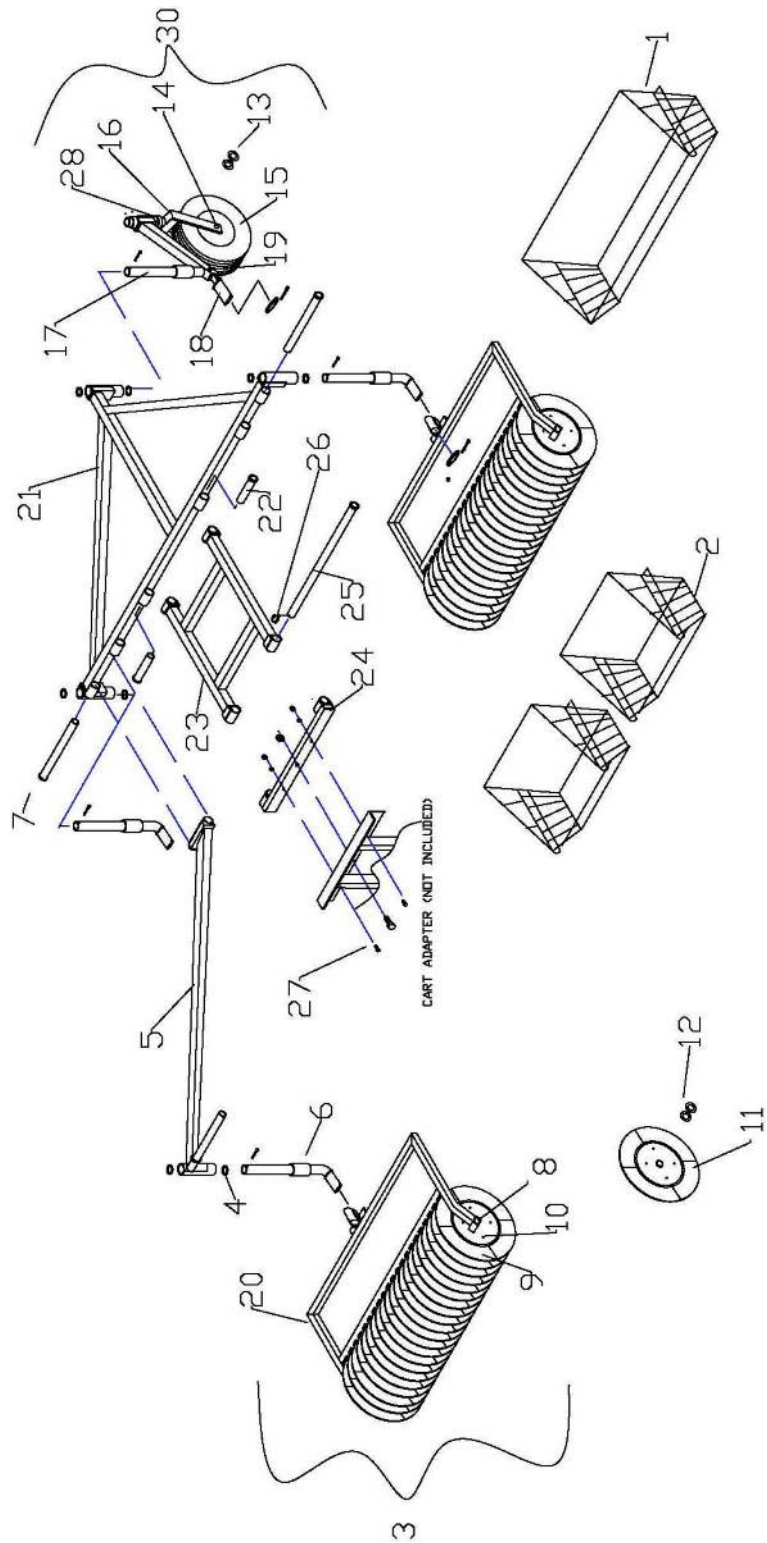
HIGH-RISE PICKER ASSEMBLY
